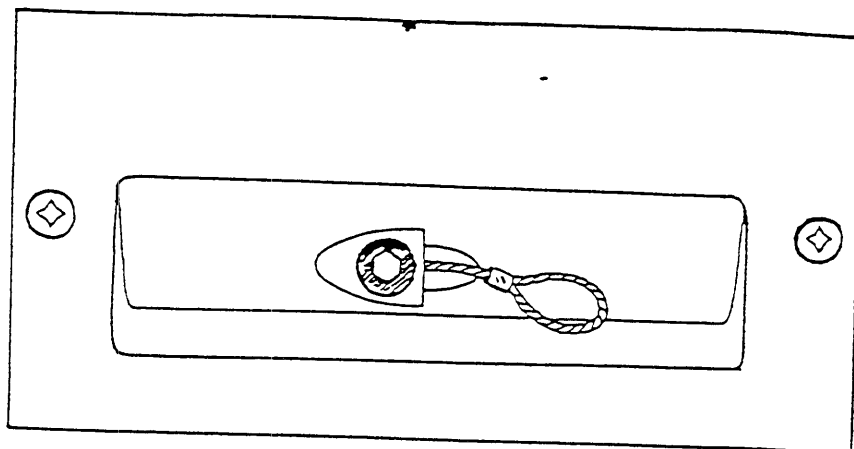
Adjusting and sleeving the Primary Air System Cable
